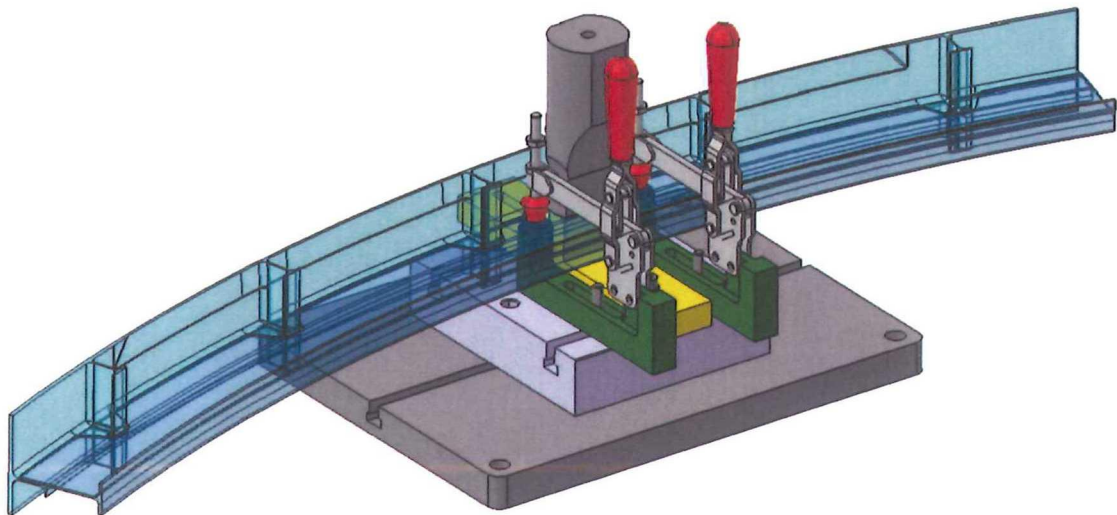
Isometric view of the Z51430 fixture to weld the fuselage frame to the orthogrid panel.
